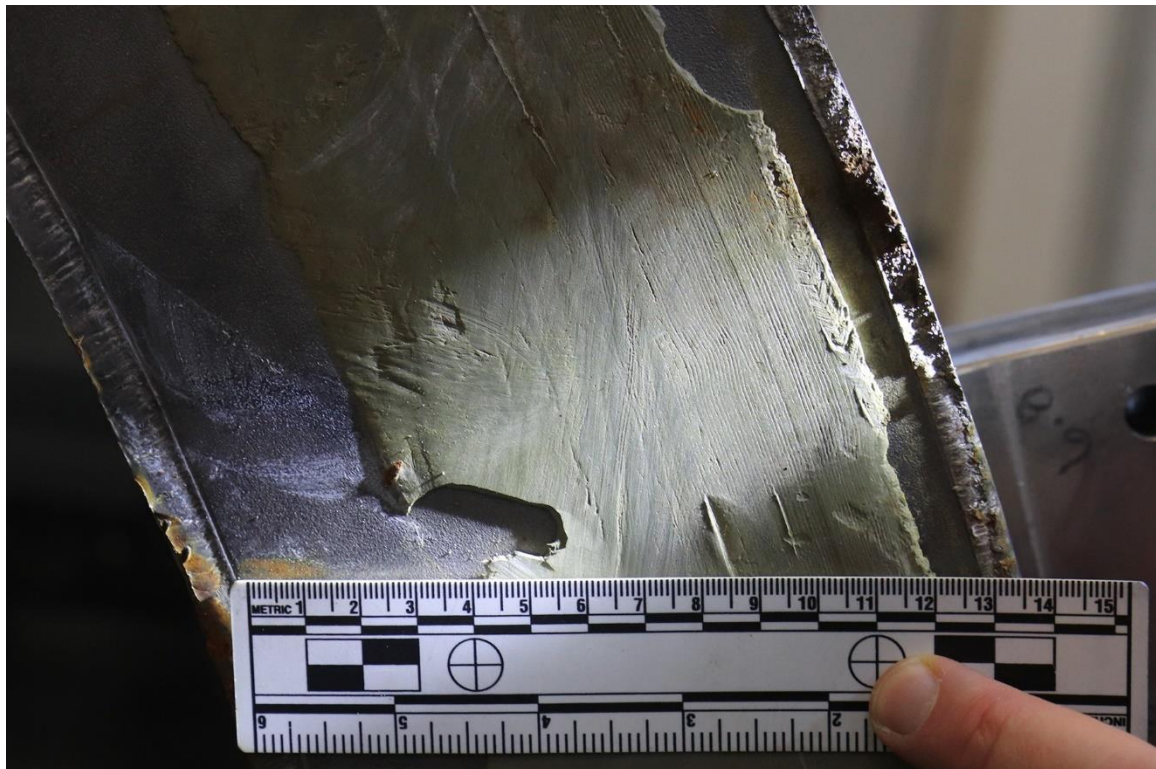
Image from the forward segment bonding C-channel showing the shear fracture of the inner rim, bending/tensile fracture of the outer rim, and disbondment of the adhesive.
